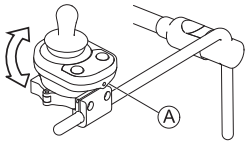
Example of DLX-REM400 adjustment. DLX-REM110, DLX-REM211 and DLX-REM216 are adjusted the same way.
